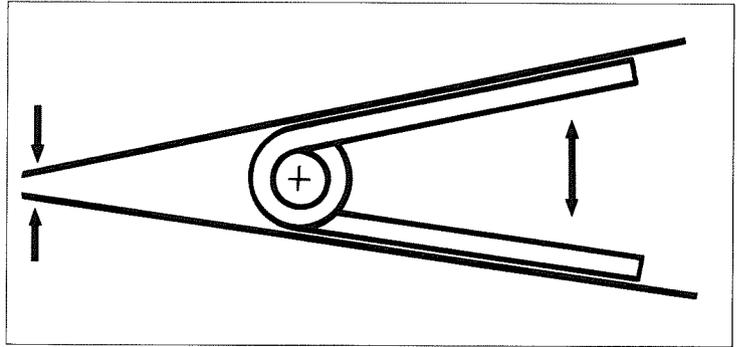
The spring in this typical welders' clamp is coiled around the fulcrum and bears upon the inside of the handles.
